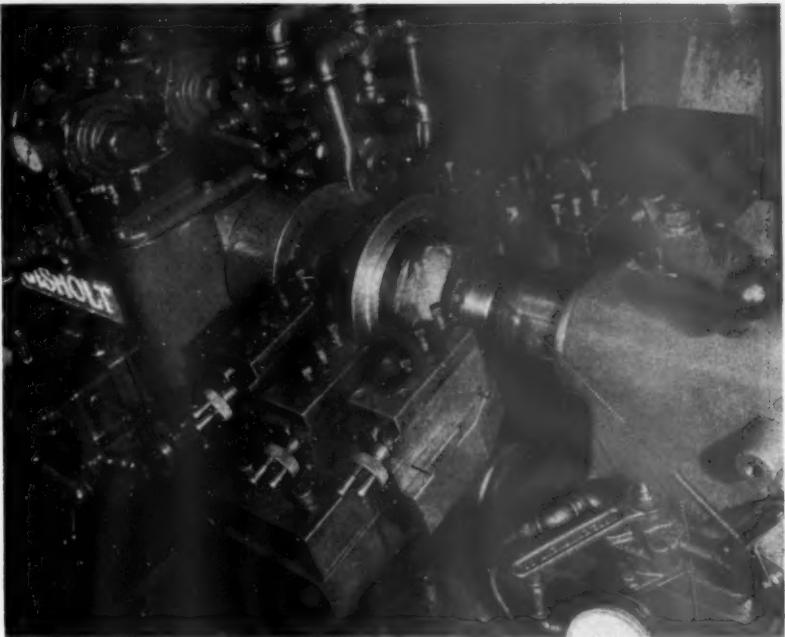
Figure VIII. Final finish machining of differential case on drive gear and bearing diameters on 12" Gisholt hydraulic production lathe.
